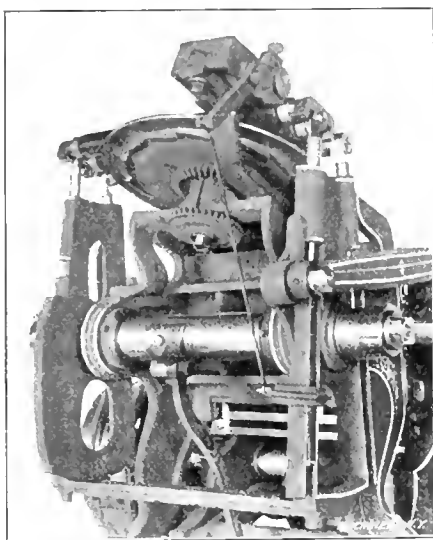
Details Brought Out, and Deep Shadows Avoided by Preparation of Machine Parts before Photographing—No Retouching made on Photograph.
